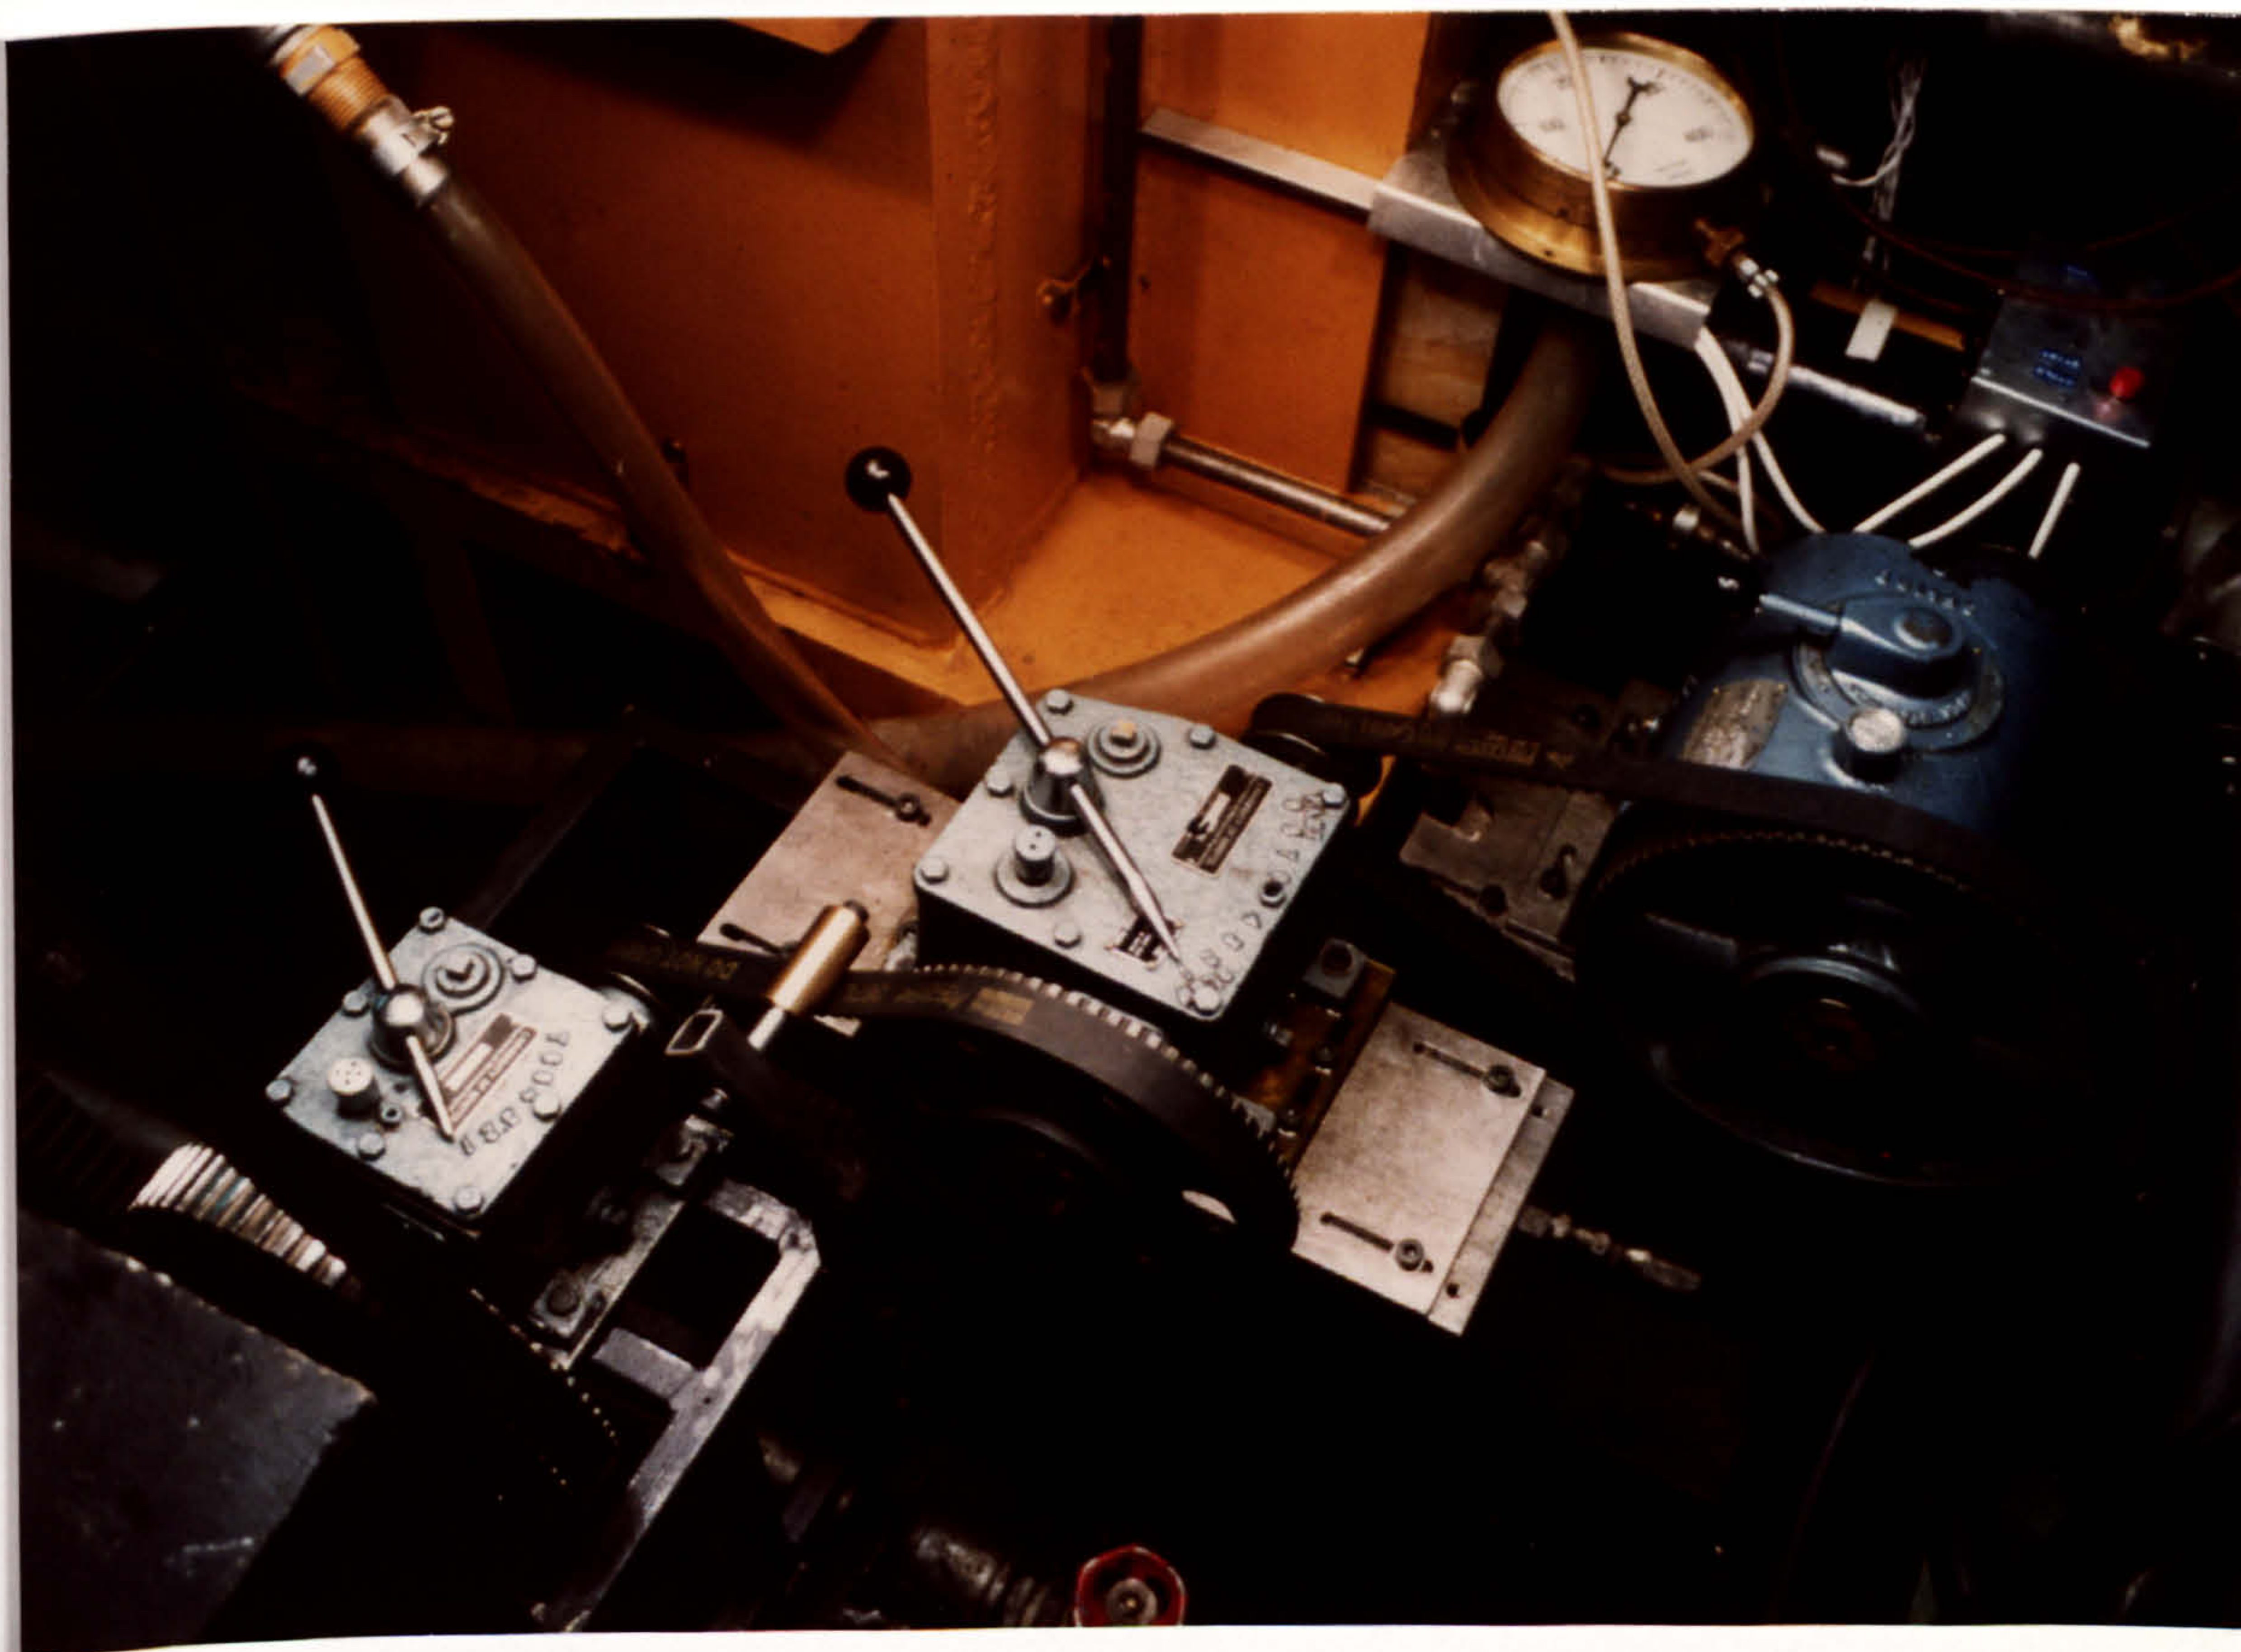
The photograph shows the train of three gearboxes which transmit the drive from the main spindle motor to the ball-screw nut on the machine slideway. A wide range of slideway traverse speeds can be achieved by the selection of pulley wheel combinations and the gearbox ratios. The final drive to the ball-screw nut is transmitted via an automatic electromagnetic clutch shown in the top right of the picture.
